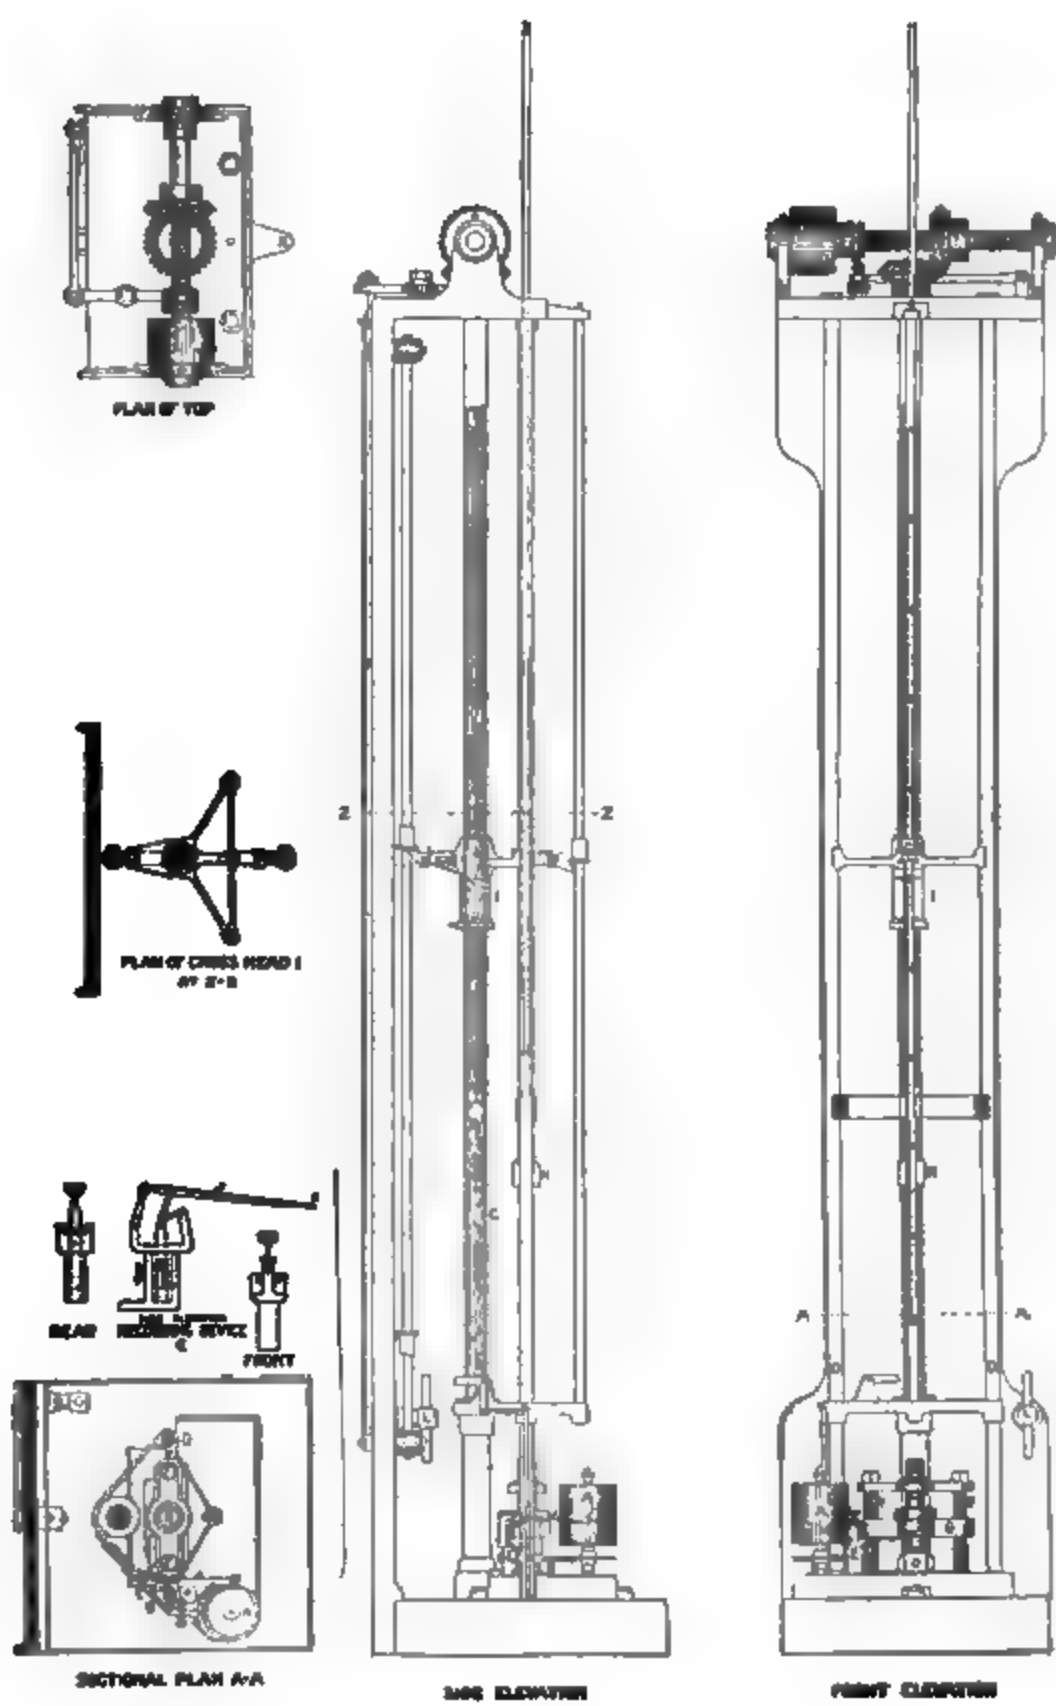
IMPACT MACHINE FOR TESTING CEMENTATION.
